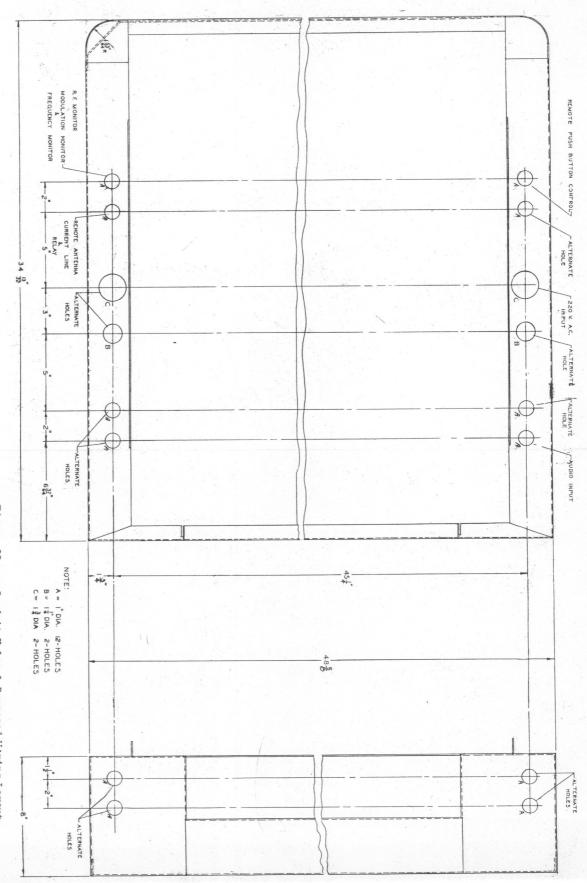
Conduit Holes & Proposed Wiring Layout.
